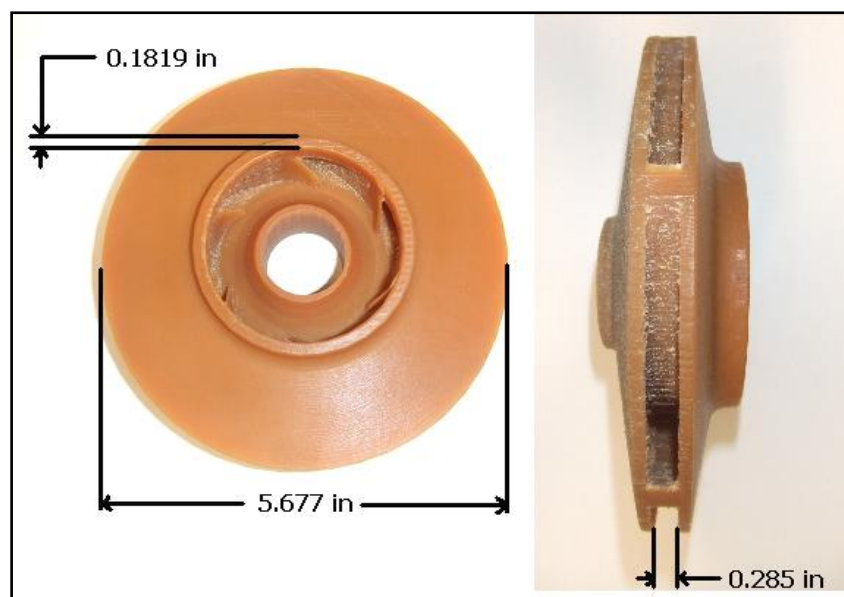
Rapid Prototyped Impeller, Complete with Dimensions
